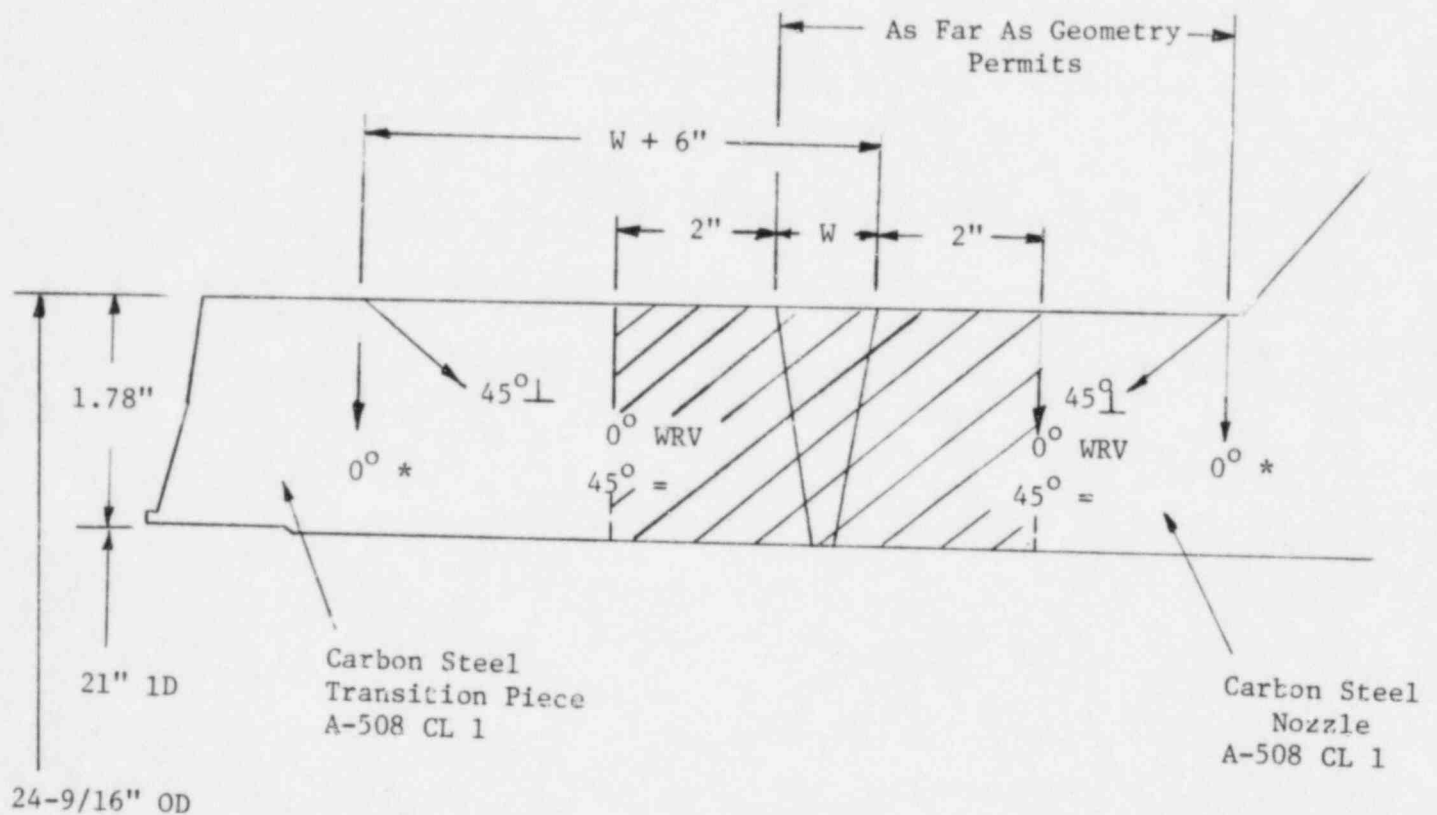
Ultrasonic Examination Procedures for Main Steam (N3) Nozzle to Transition Piece Welds. Cal. Block "Steam"
